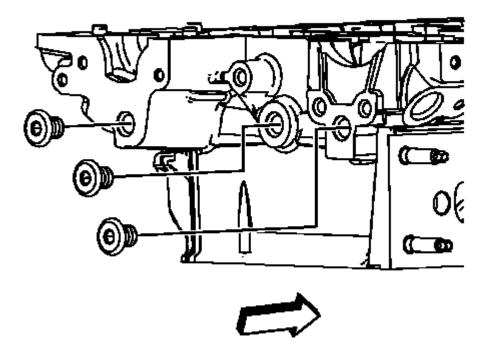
Cylinder Head Plugs Courtesy of GENERAL MOTORS COMPANY
